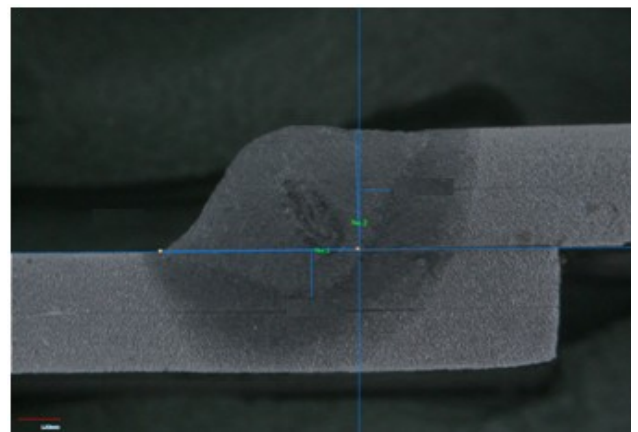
MACROGRAPH OF WELD CROSS SECTION.
